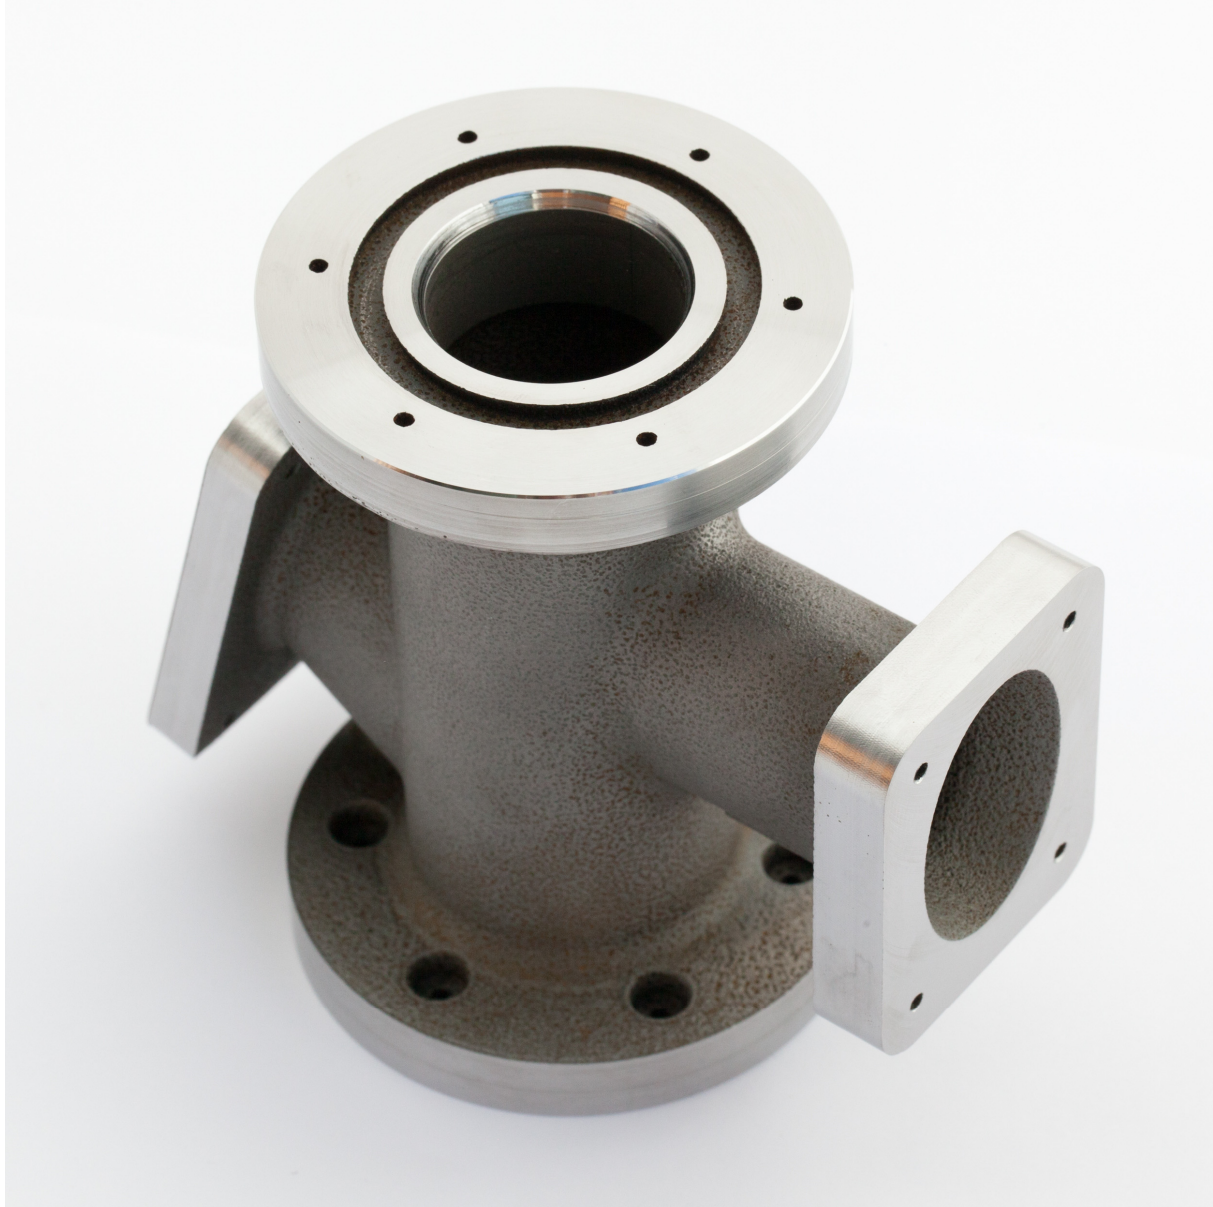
The machined mock-up component (tool steel H13). The removal of the oxidation layer by etching and sand blasting after the softening heat treatment has left the as-built surface pitted.
